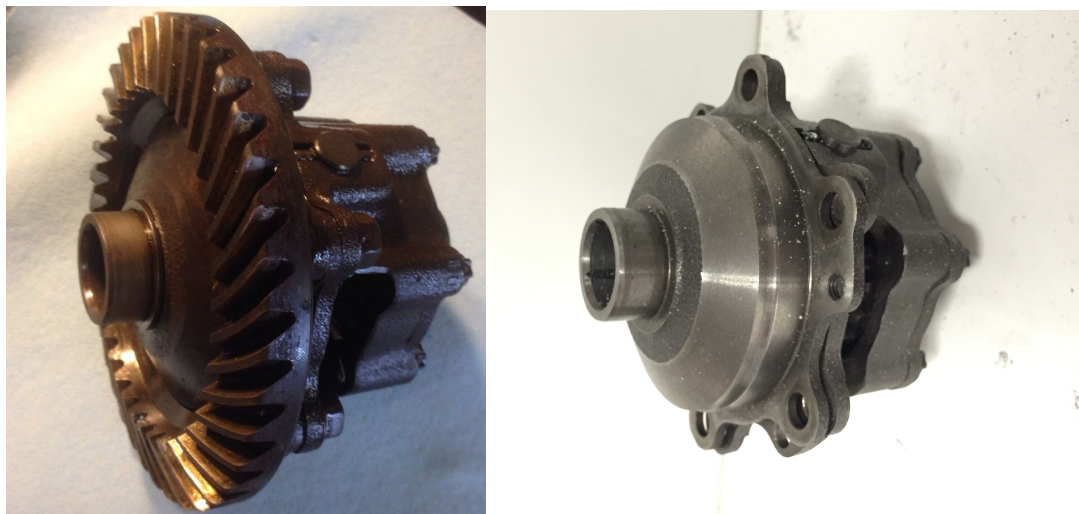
The TRX 300 Differential Before and After Ring Gear Removal
